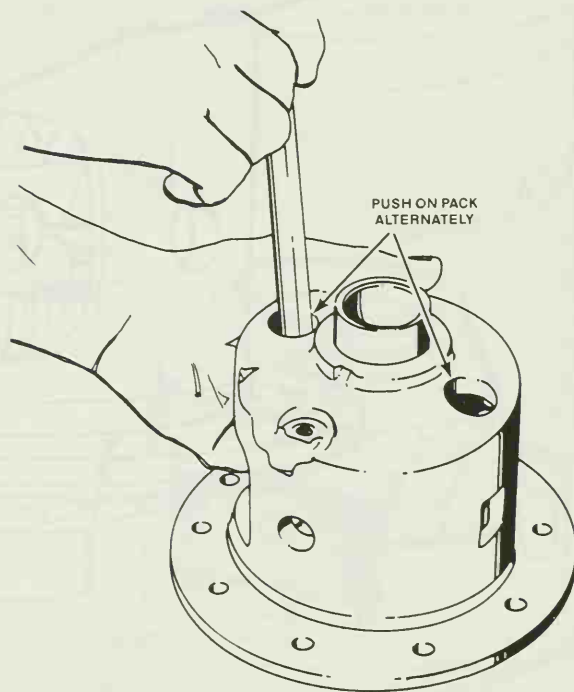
The clutch pack is removed by tapping with a brass drift. (Pontiac Motor Division of General Motors Corporation)
